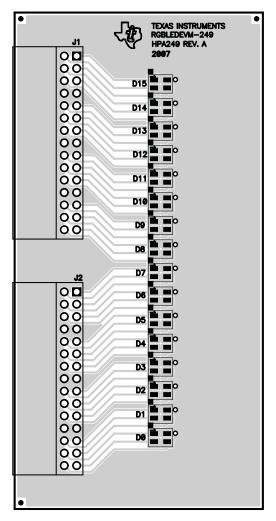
RGBLEDEVM-249 Assembly Layer Routing
